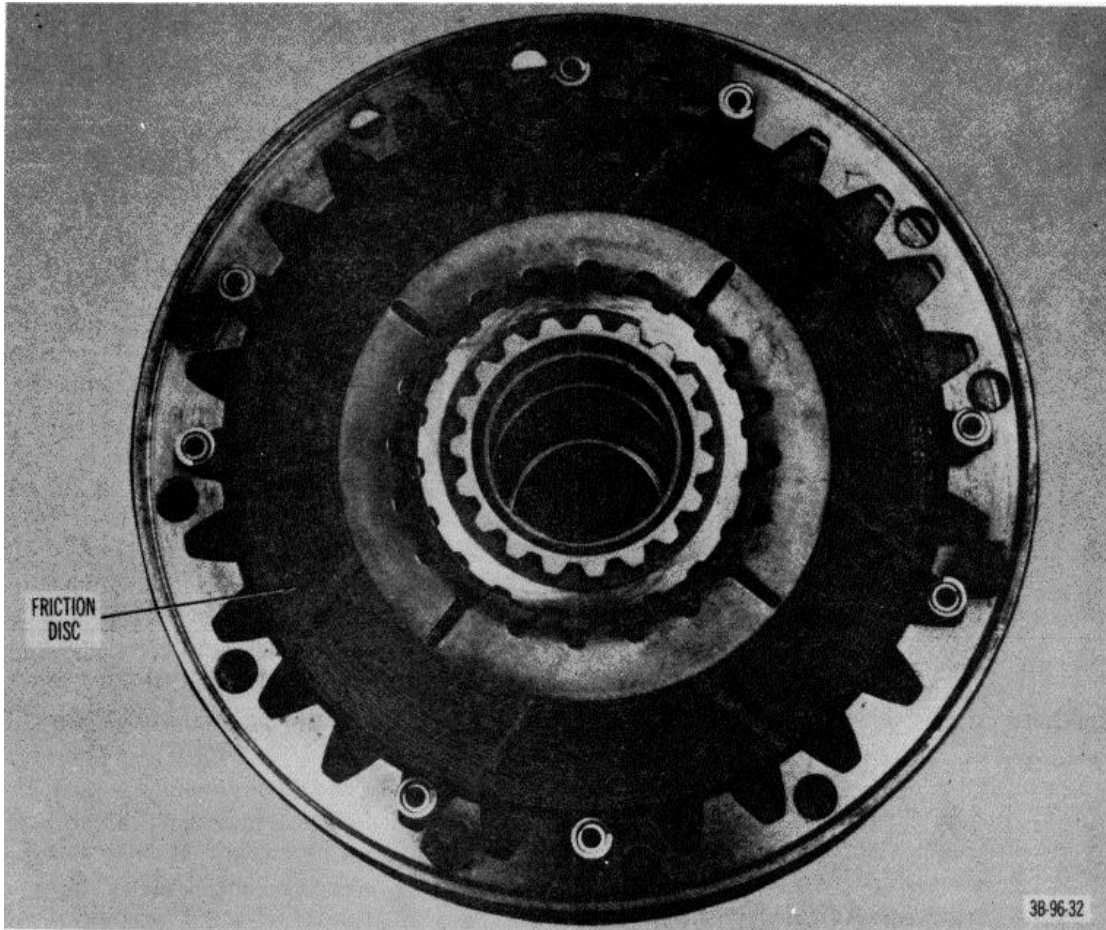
Assembled retraction springs installed on lugs of separator plate.
